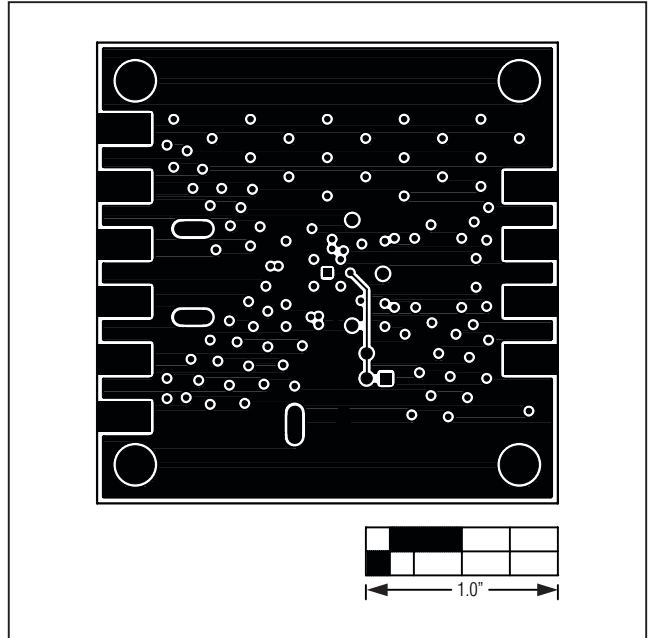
MAX9626 EV Kit PCB Layout—Solder Side
